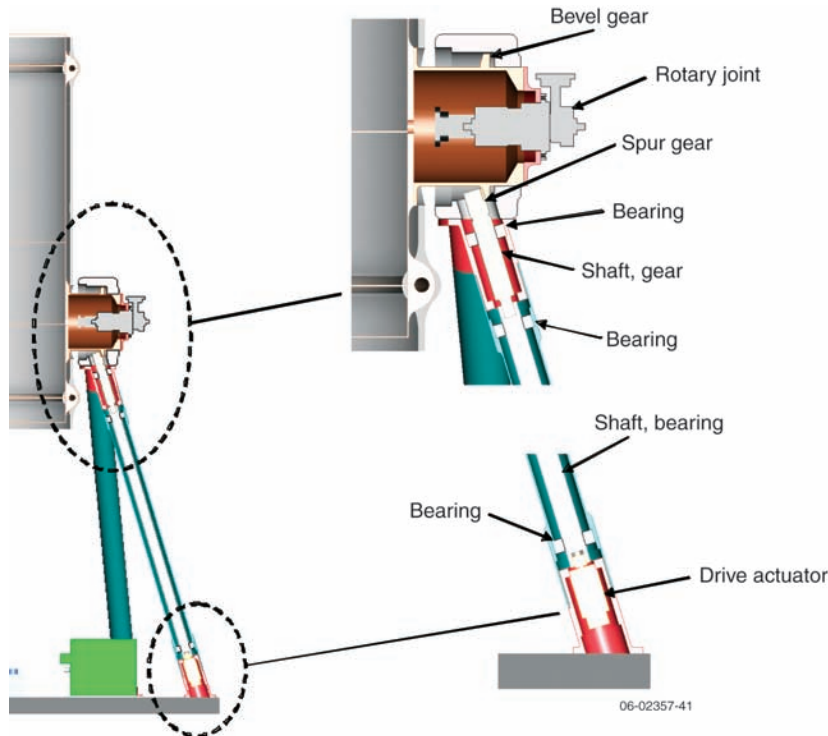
Antenna assembly gimbal design shown with thermal blankets removed.
